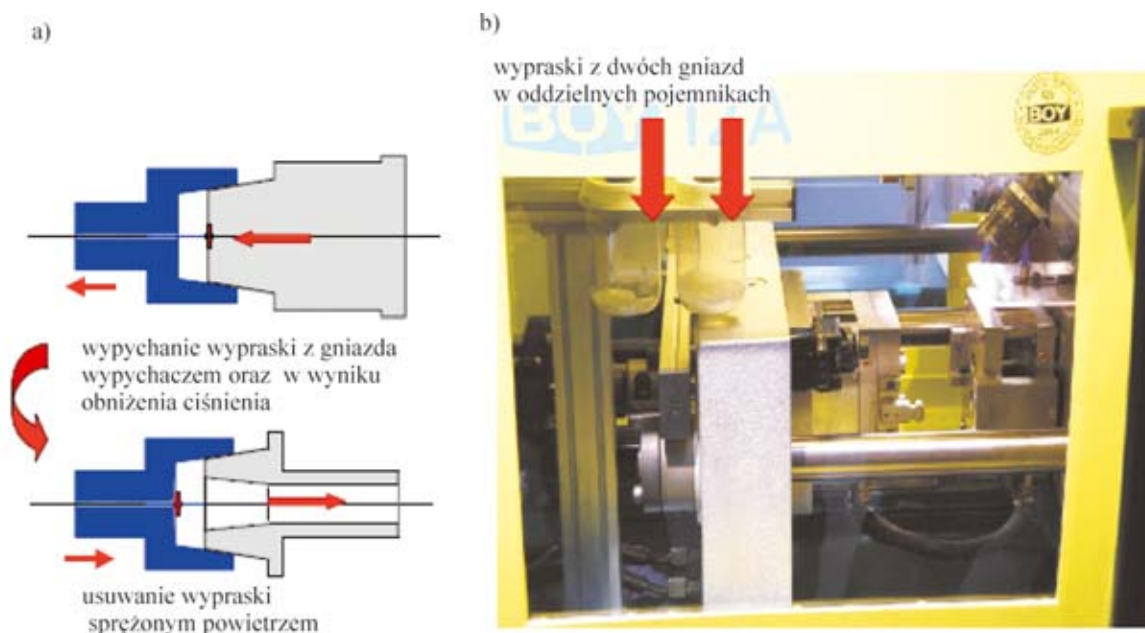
Boy microinjection molding machine equipped with clean air box [18]
